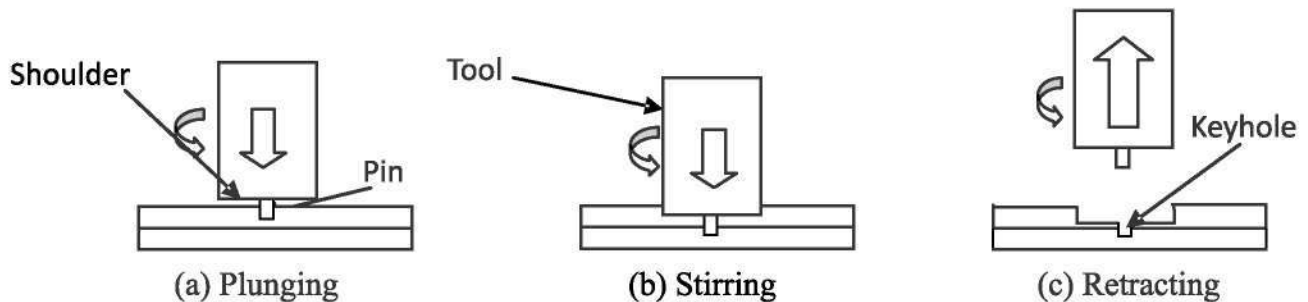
Schematic sequence in Friction Stir Spot Welding
